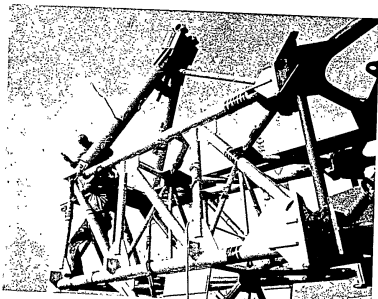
Installation of the 4800-lb steel, adjustable, rear support leg assembly for the reflector. A jury strut is used to hold the rear support leg in place until assembly of center section of reflector truss is installed.
